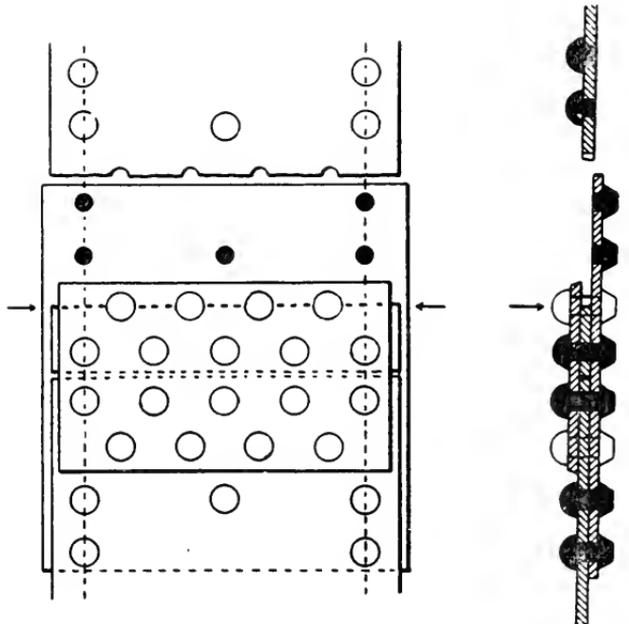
FRACTURE THROUGH THE NEXT-TO-INSIDE ROW OF RIVETS.
